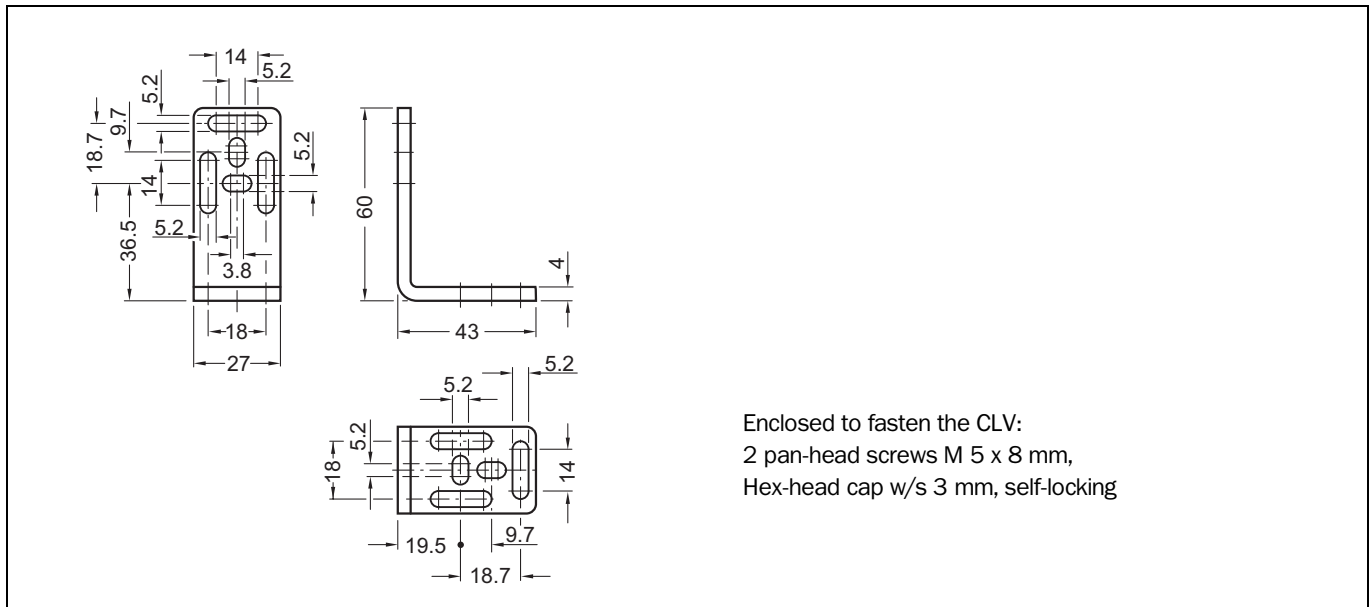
Dimensions of the mounting bracket No. 2 020 410
